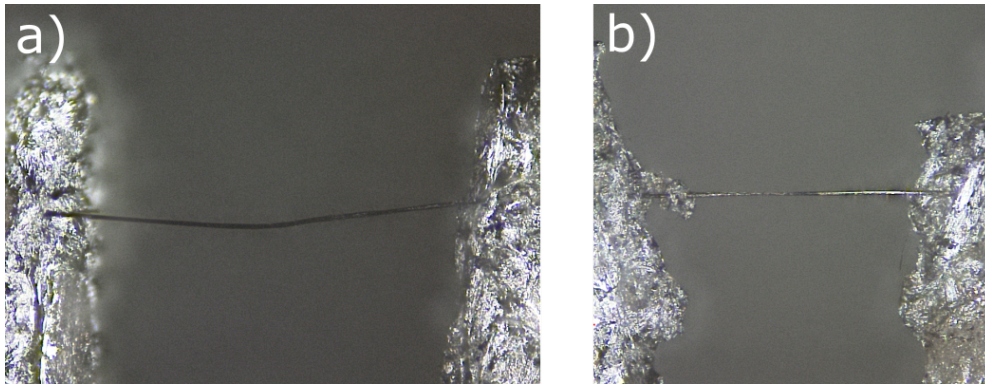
Images of CNF soldered onto Dantec prong. Image a) shows a properly soldered wire, while Image b) is an example of poor soldering quality. Note how in b) part of the solder covers the sensing part of the wire. The apparent size difference is due to the pictures having different scales.
